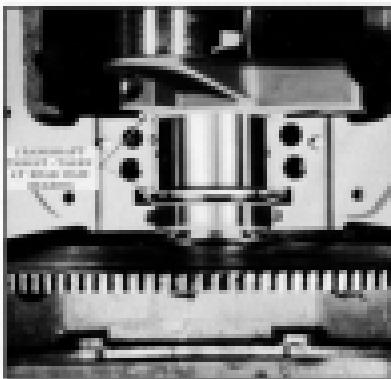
Rear Main Bearing With Integral Thrust Plates.
